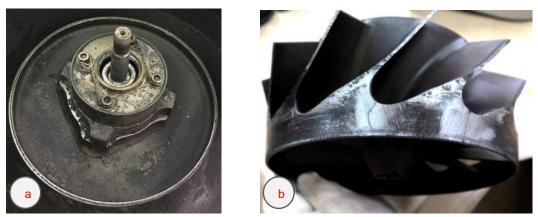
Fan shaft damage and cracked impeller [Source: Leonardo Helicopters]
